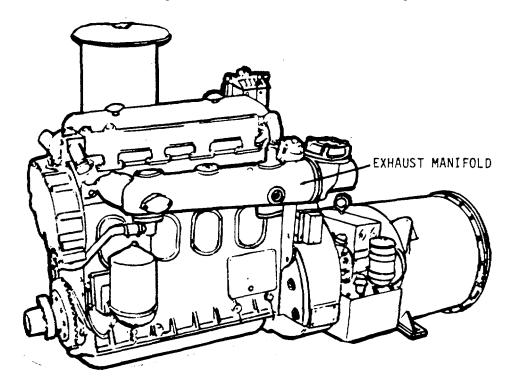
52. Water-Cooled Exhaust Manifold Mounting
